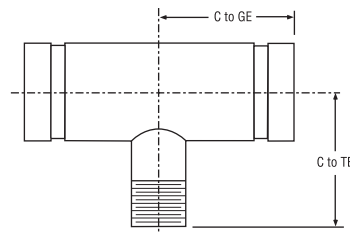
Groove x Groove x Male Thread Reducing Tee
